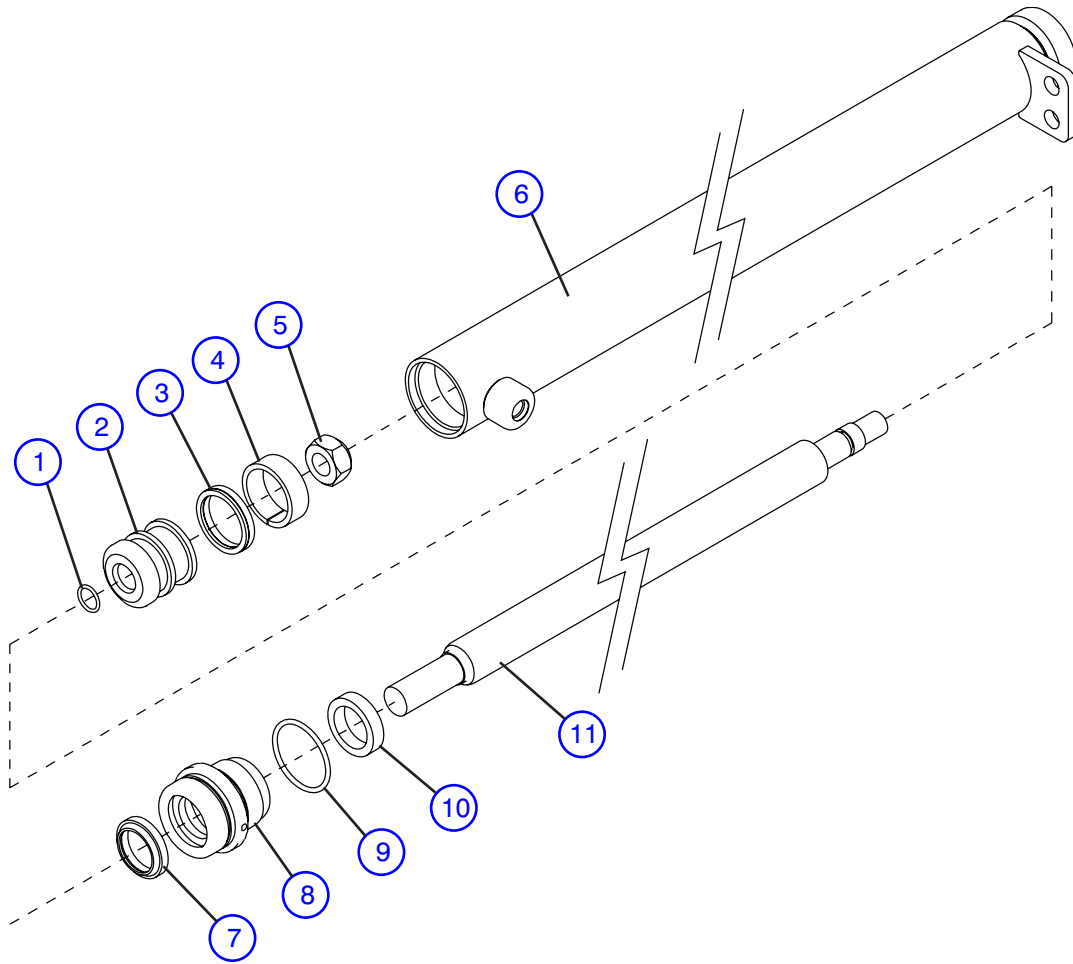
Powered Extension Cylinder Mounting Hardware
